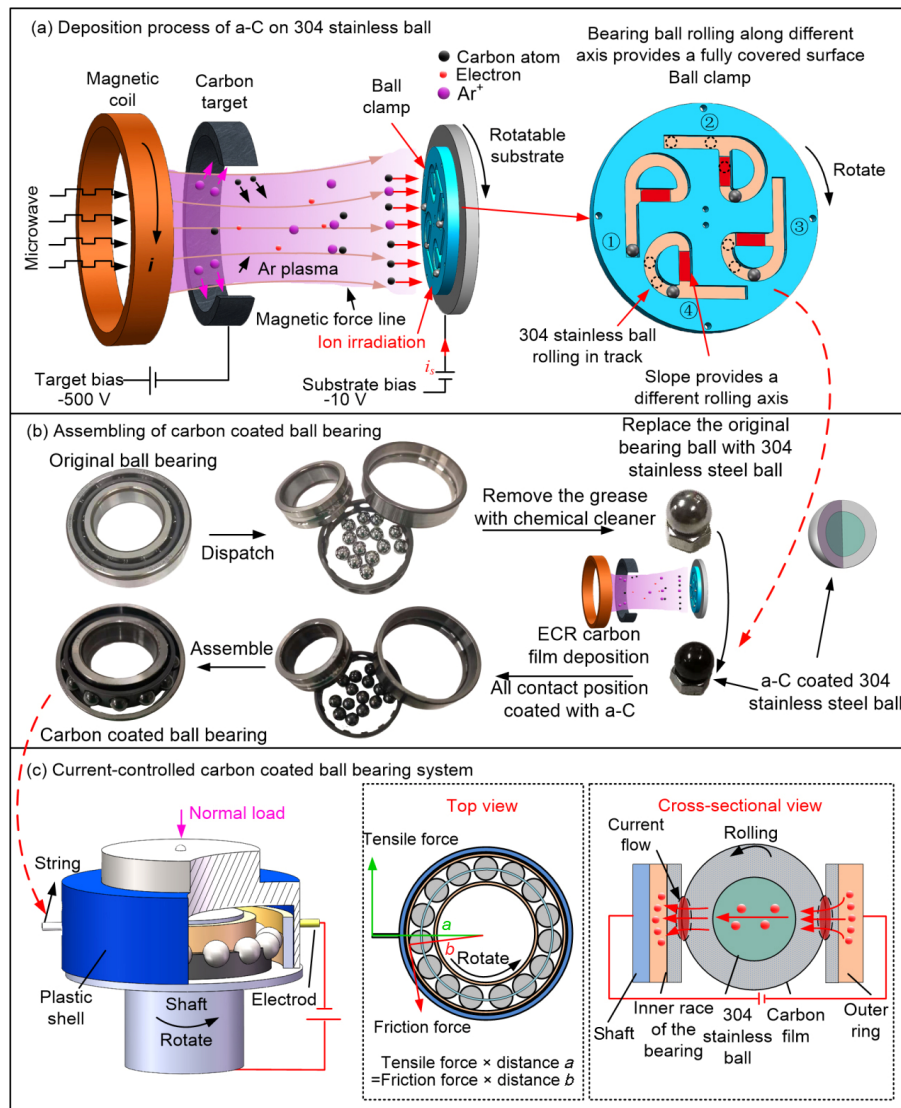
Fabrication processes of the carbon coated ball bearings and current-carry friction test system. Schematic of (a) process of depositing ECR a-C film on bearing balls as well as the ball clamp, (b) assembling-process of carbon coated ball bearing, and (c) friction test system for current-carrying carbon coated ball bearing.
